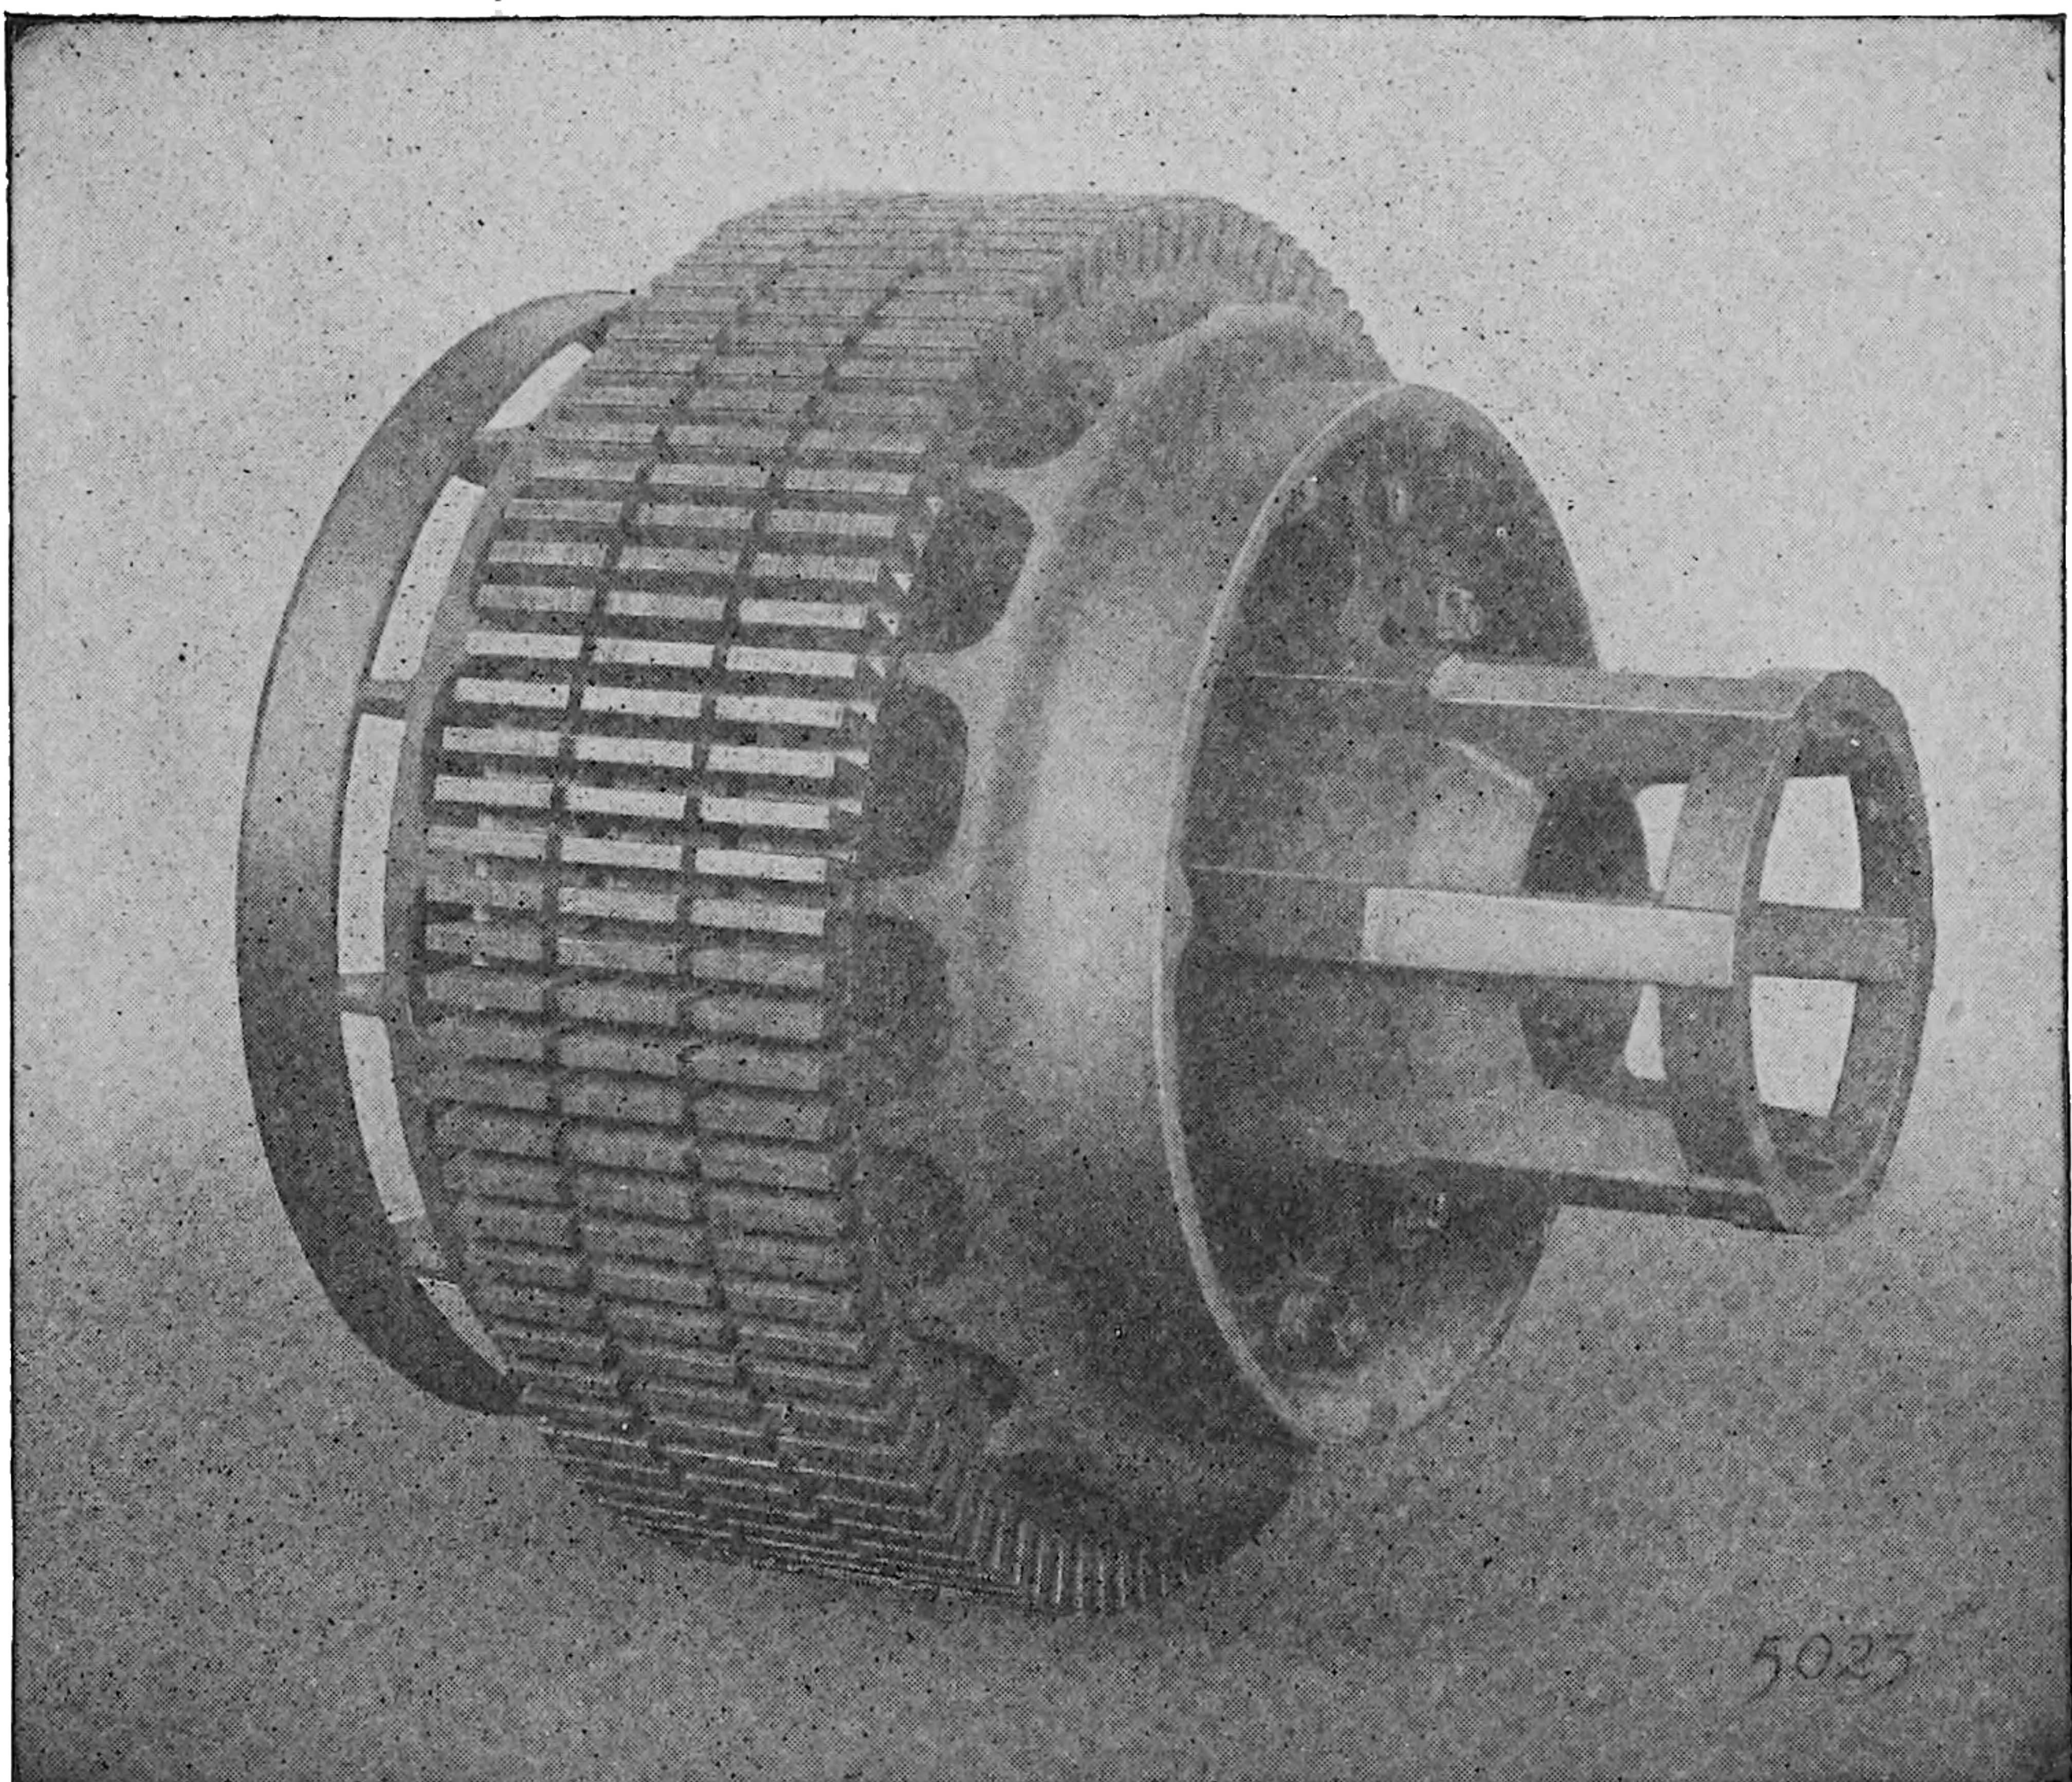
Crocker-Wheeler Armature Core for Form H Motor
